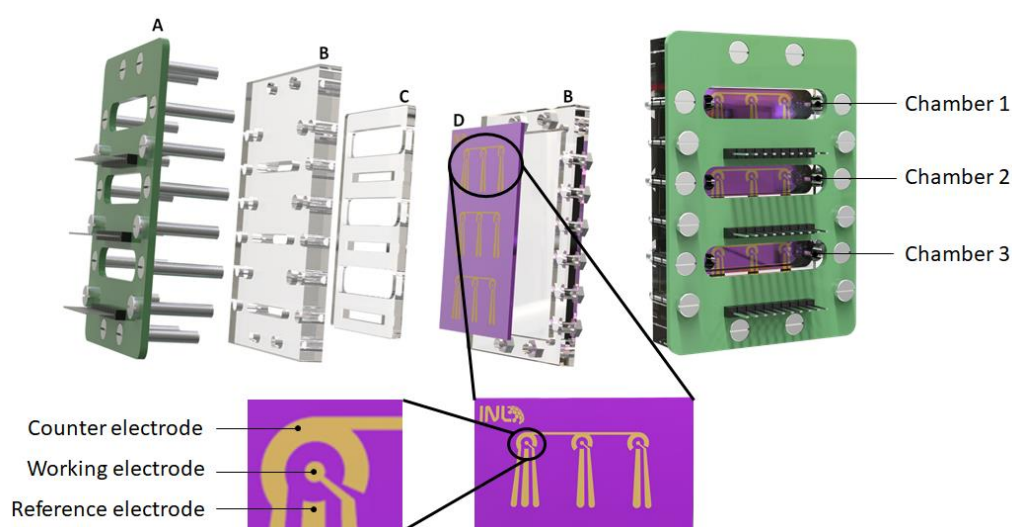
Electrochemical integrated detection system. A) electrical connector; B) PMMA chamber top and bottom parts; C) PDMS O-ring; and D) microfabricated Au sensor.
